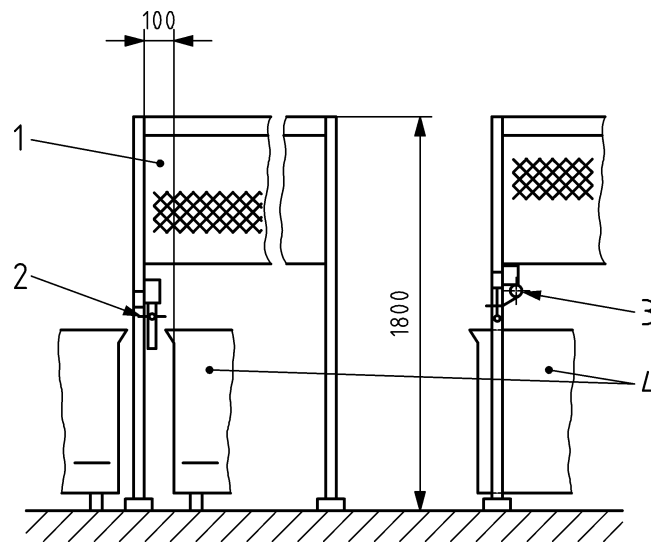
Safety dimensions on cubes cutting machine with a loading device
